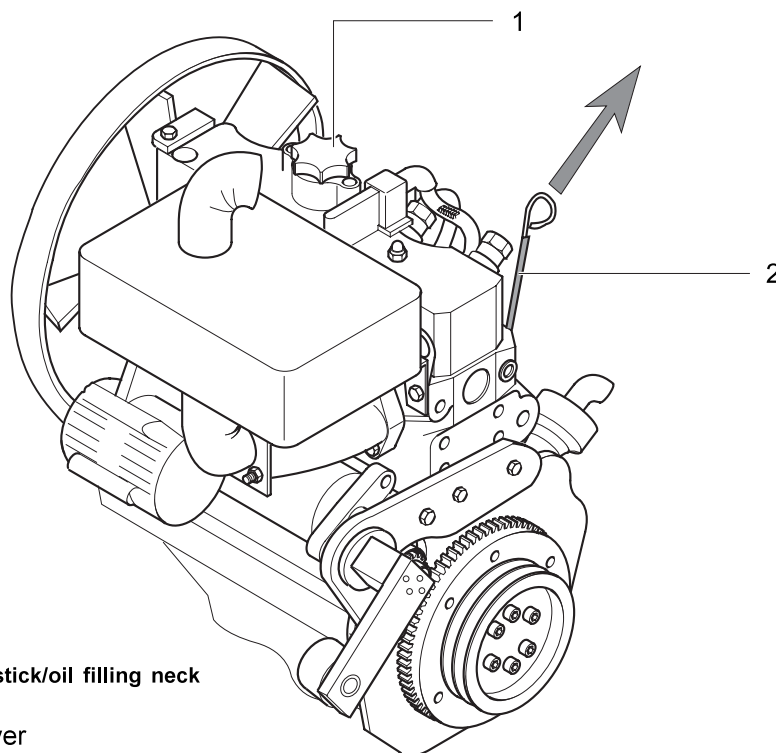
Diesel engine oil dipstick/oil filling neck
